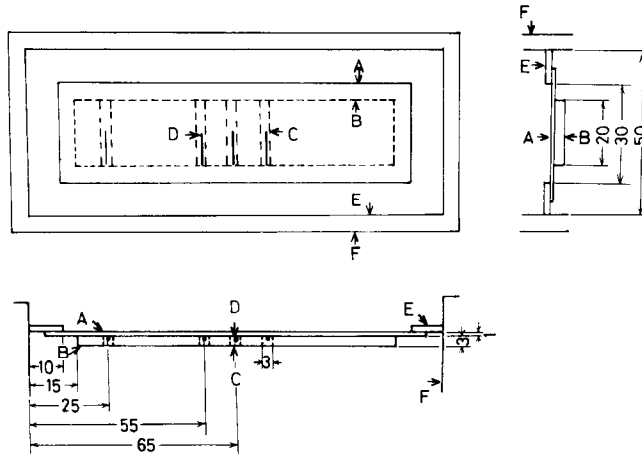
Details of heating section (dimension in millimeter). A. 316 stainless steel boiling surface. B. Copper heat conductor. C. Copper element for thermocouple. D. Thermocouple. E. 304 stainless steel plate. F. 304 stainless steel boiling tank.
